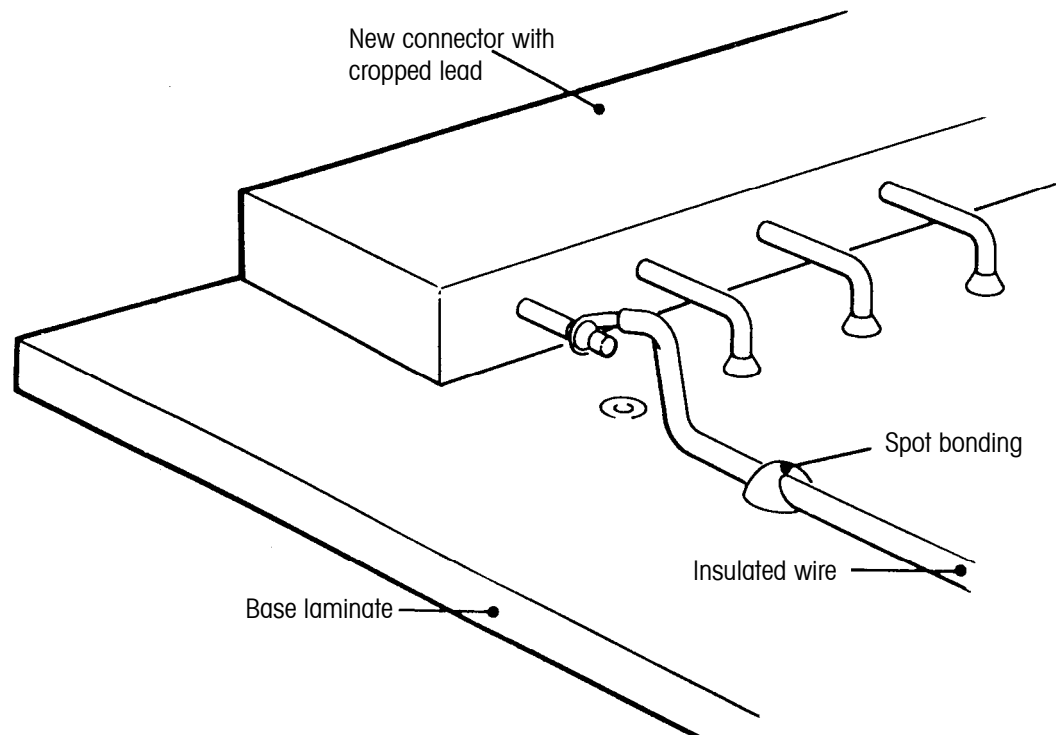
Mounting a connector with a wire link soldered onto a cropped lead
